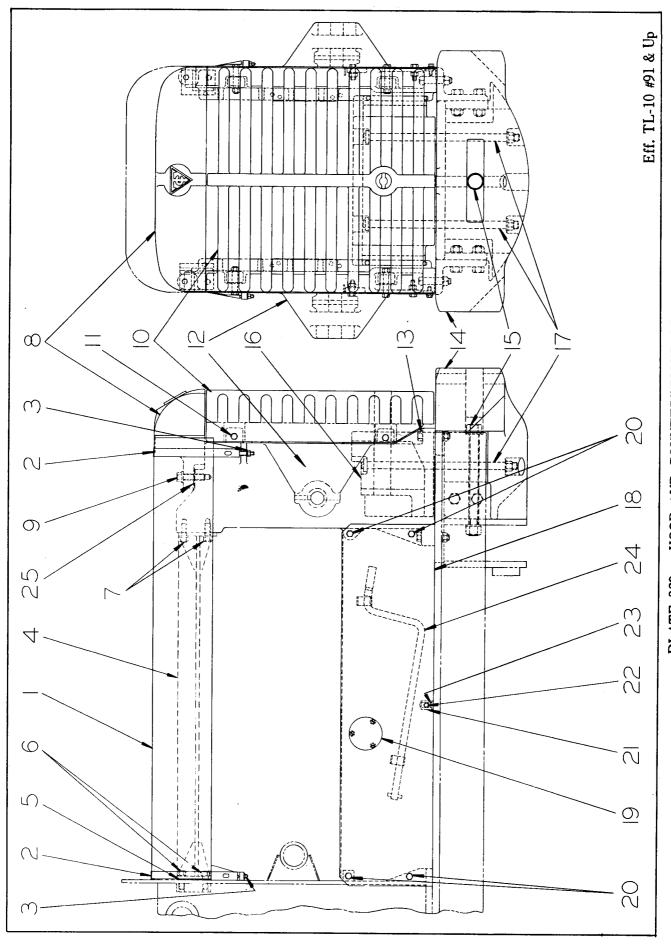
HOOD AND COUNTERWEIGHT GROUP
